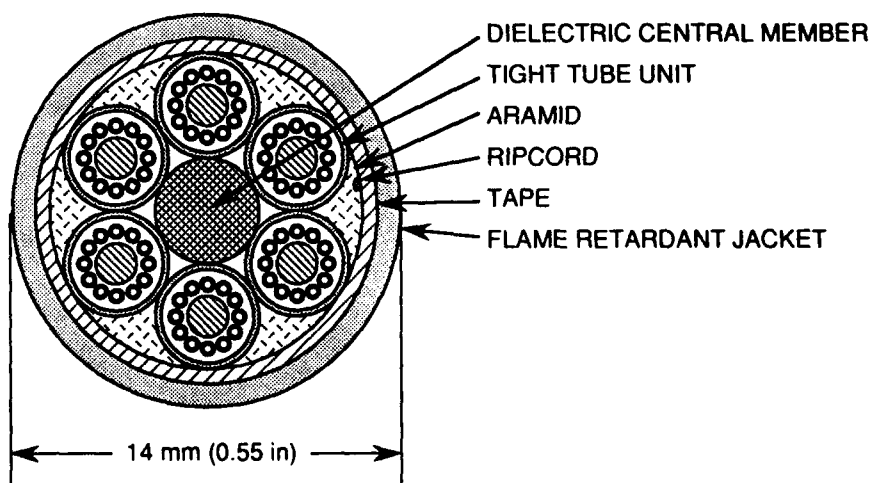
Cross Sectional View of Compact High Fiber Count Intrabuilding Cable (72 Fibers)
